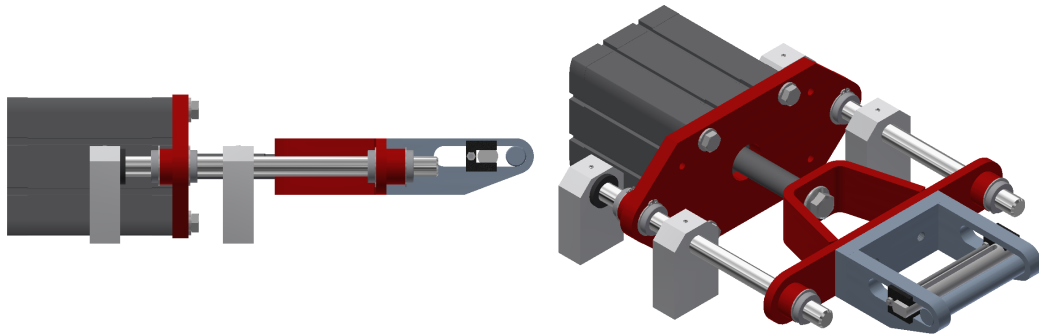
CAD representation of sub-assembly consisting of pneumatic cylinder, linear guidance shafts and bearings as well as plate to which material grip is fixed
